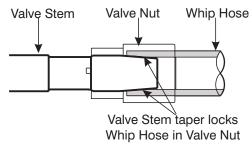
Valve Nut Secured to Valve Stem and Whip Hose.
